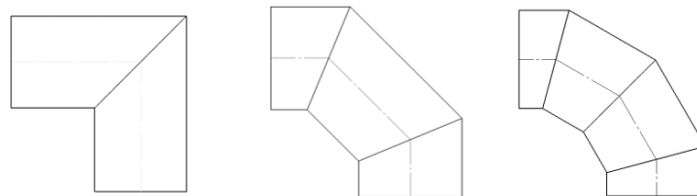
1 Weld (1W), 2 Weld (2W), 3 Weld (3W) Miter Bends
